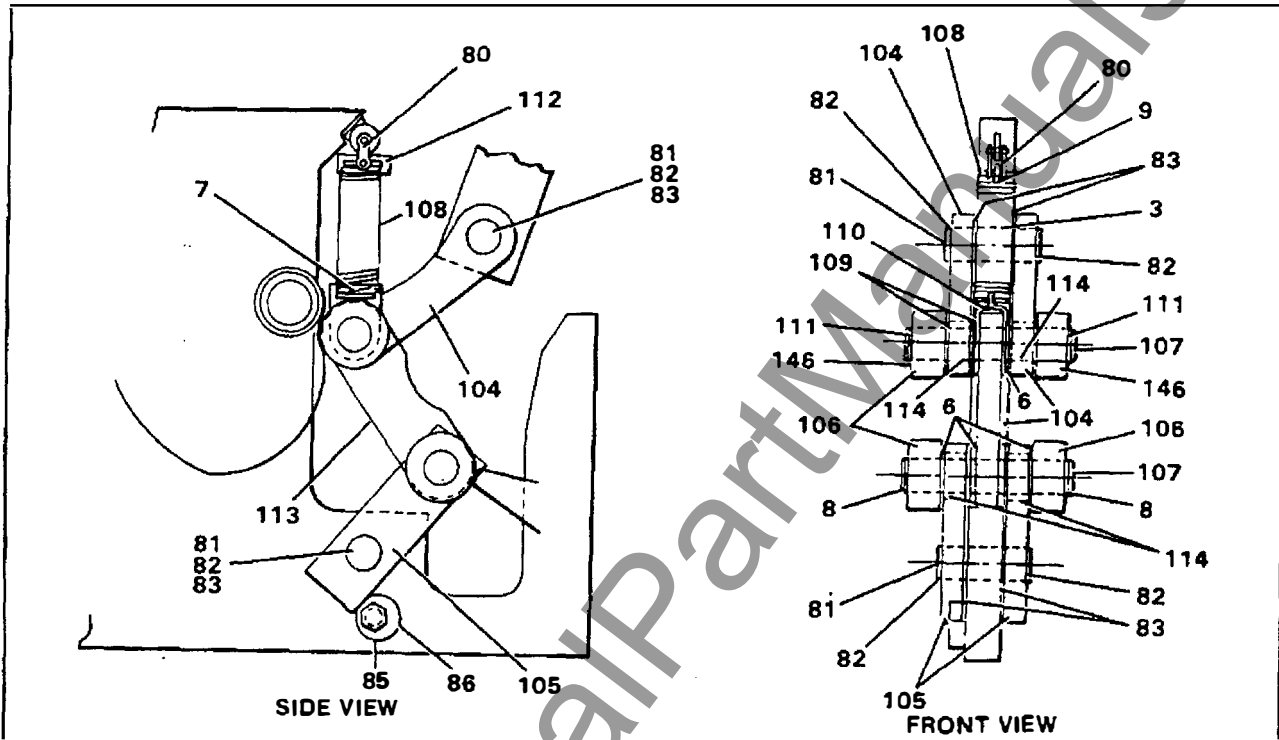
Type 515-1 Stored Energy Operator Assembly — VIEW A
